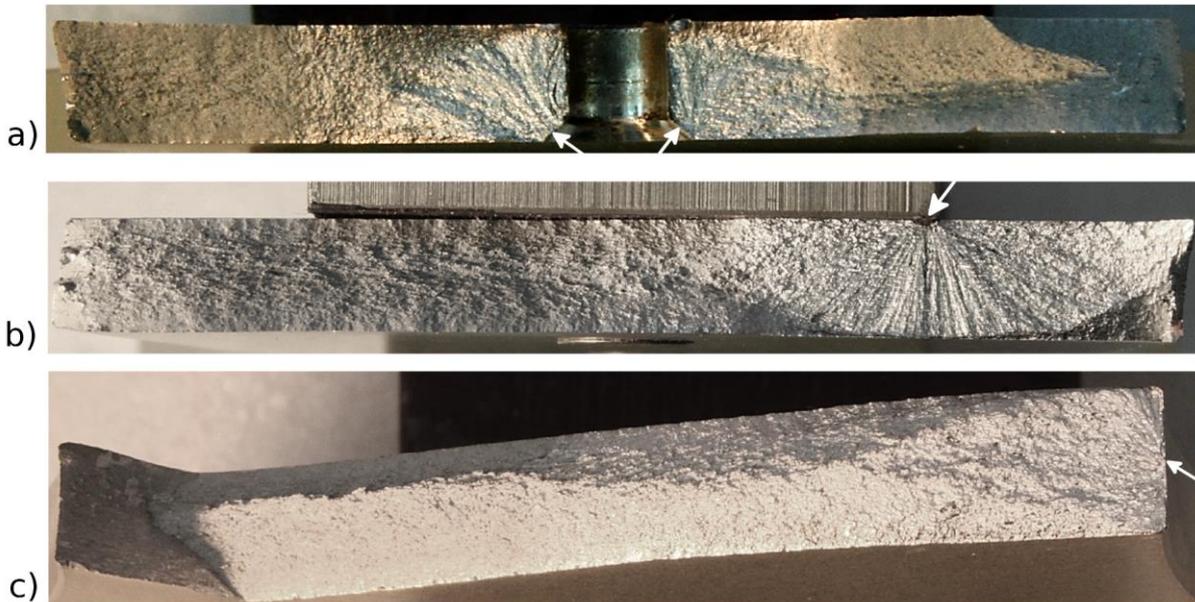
Typical failure observed during testing: a) hole initiation, b) fretting corrosion, c) radius initiation.
